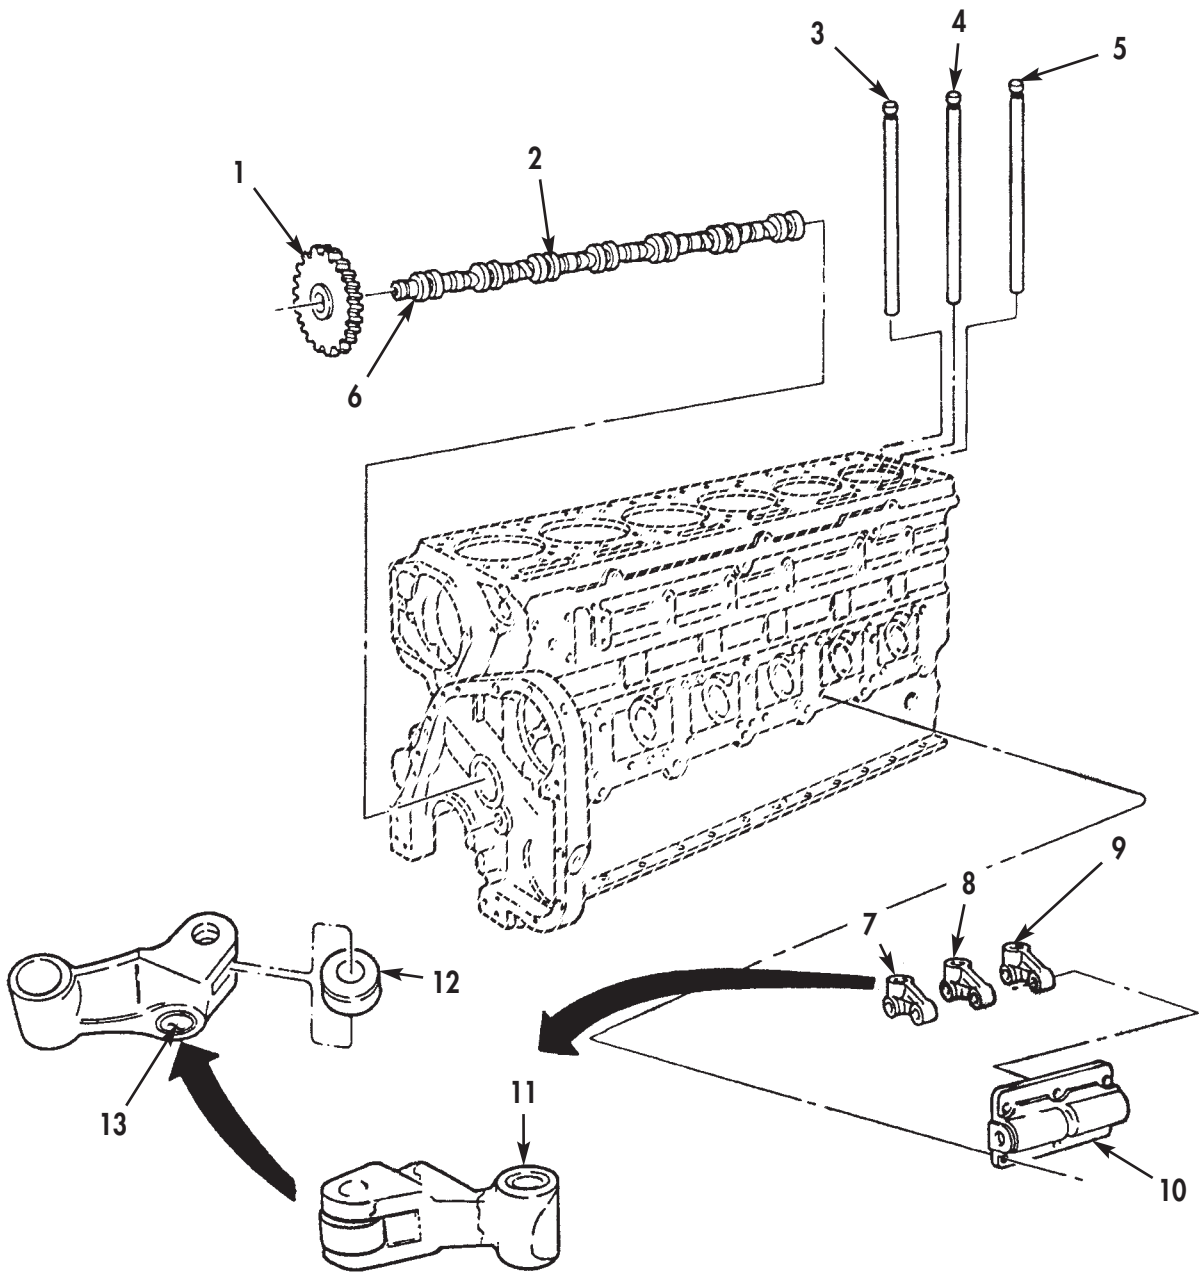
Camshaft, Camshaft Followers, and Push Rods Cleaning and Inspection.
